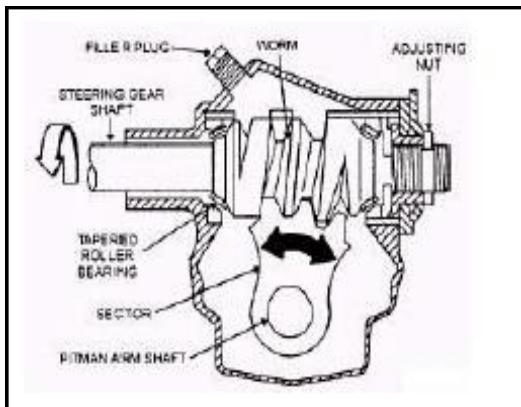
Worm and sector steering gear system (<http://www.tpub.com/basae/213.htm>)
